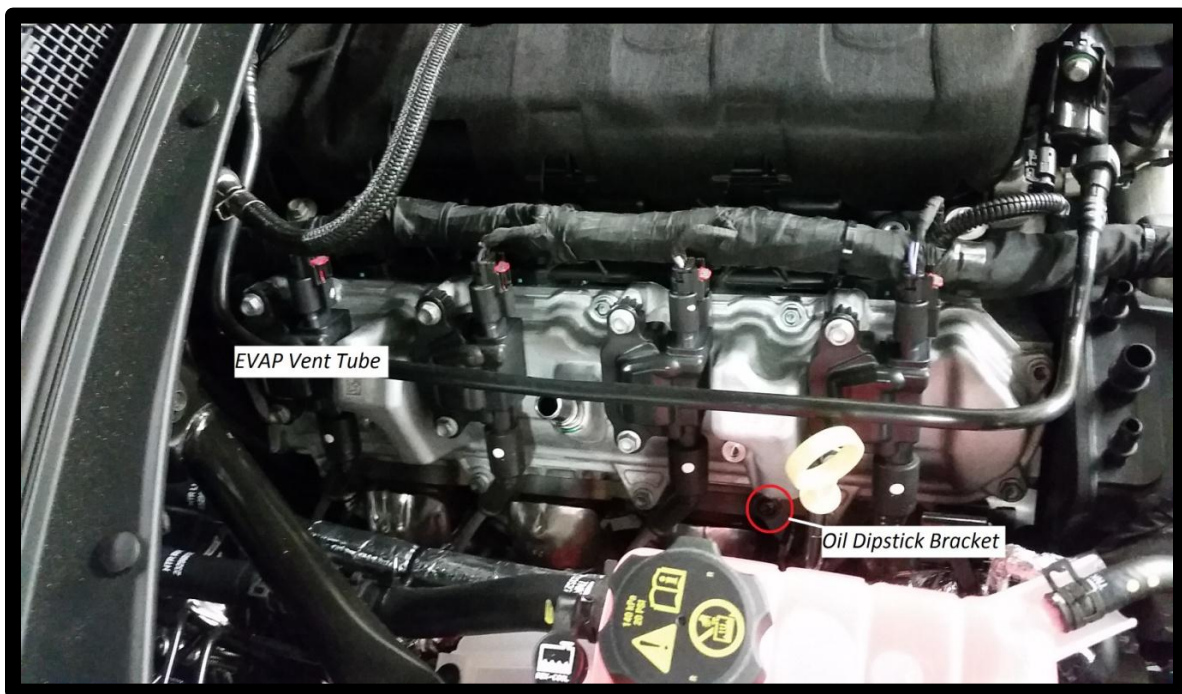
Evap Vent Tube & Oil Dipstick Bracket
